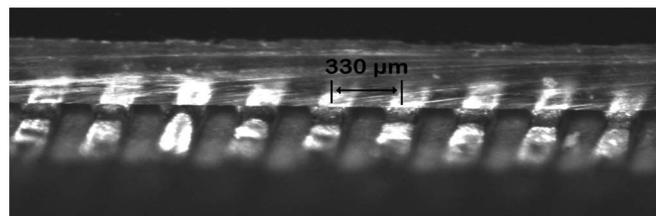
Magnified view of the InSn solder bonds between (top) a 10 V PJVS silicon chip and (bottom) the copper traces on the “flex” microwave dielectric base layer. The recently reengineered chip-bonding machine precisely controls the thickness of the solder in the gap (approximately 50  $\mu$ m on this cryopackage). (*Note: The mirror finish of the diced chip edge shows the reflection of the copper fingers below.*)
